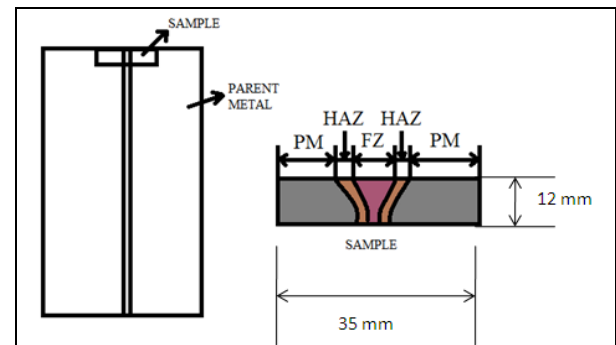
Schematic diagrams for the cutting plane of the welded sample
